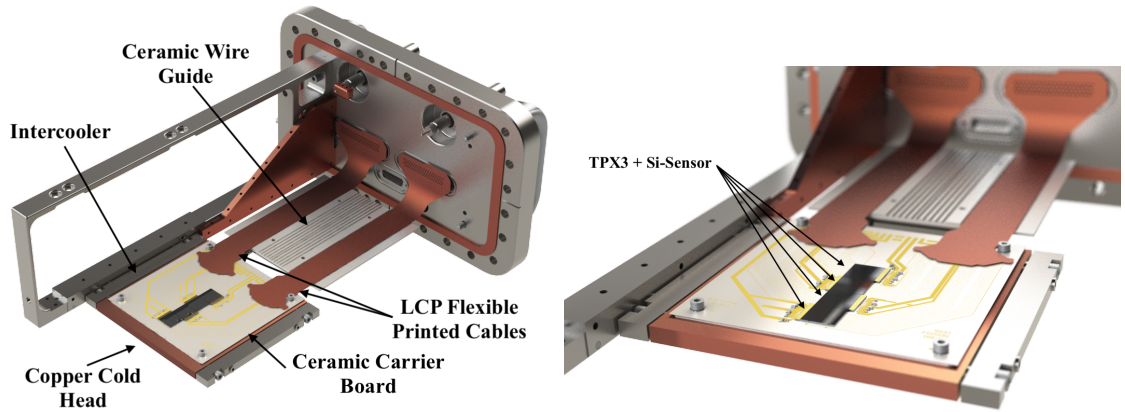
Left: Rendered image of the detector sub-assembly. Right: close-up view of the ceramic carrier board.
